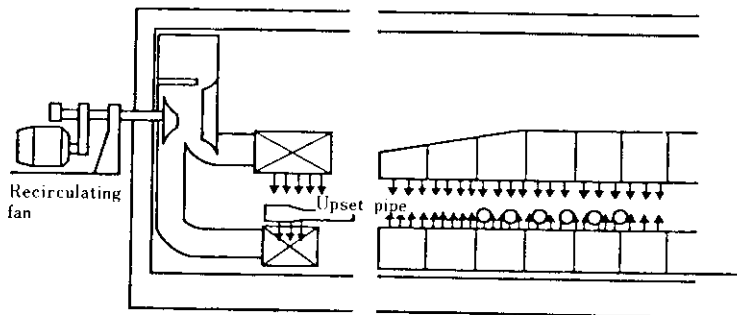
Rapid heating equipment for upset portion in the drawing furnace
